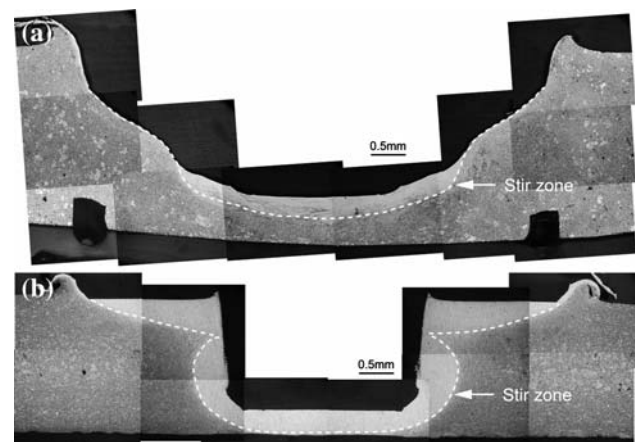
(a) Removal of almost the entire stir zone when the rotating tool is withdrawn during AZ91 spot welding. In spot welds made using a tool rotational speed of 3000 RPM, a plunge rate of 2.5 mm/s and a dwell time of 4 s. (b) The profile of an AM60 spot weld following removal the rotating tool at the end of the spot welding operation. In spot welds made using a tool rotational speed of 3000 RPM, a plunge rate of 2.5 mm/s and a dwell time of 4 s
